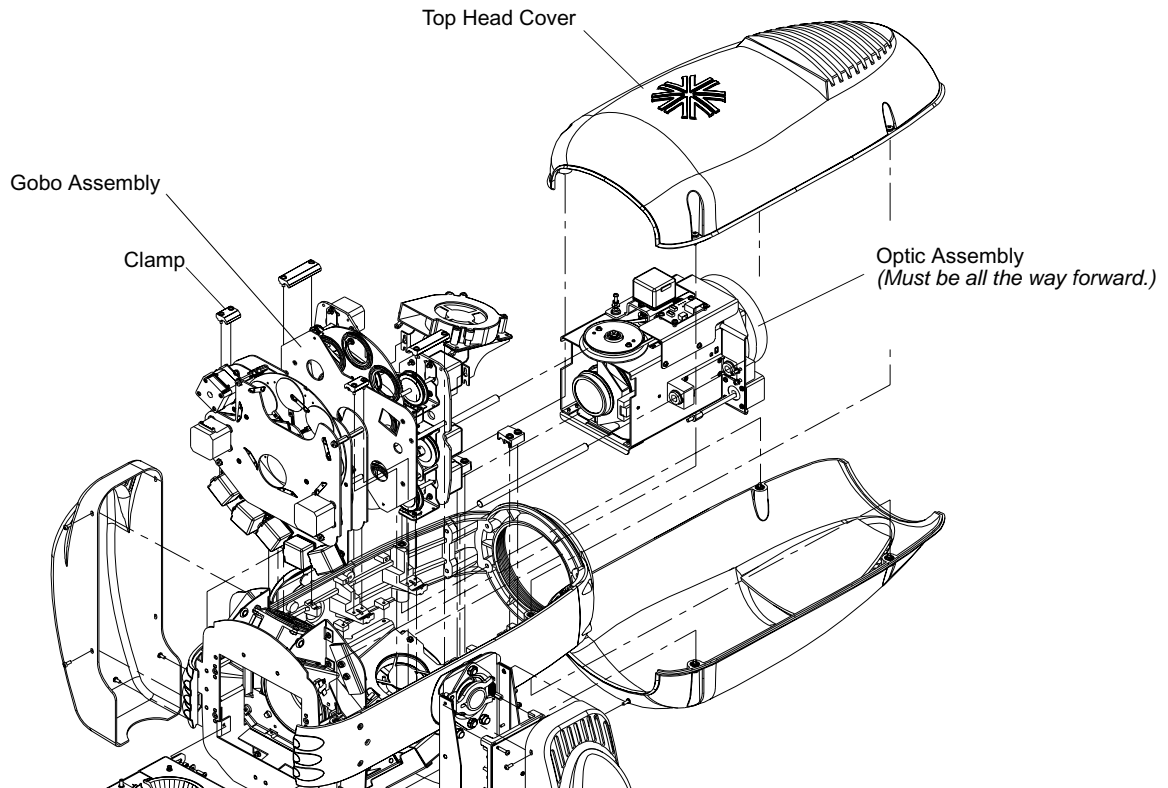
VL3000 Spot Gobo Assembly Replacement
